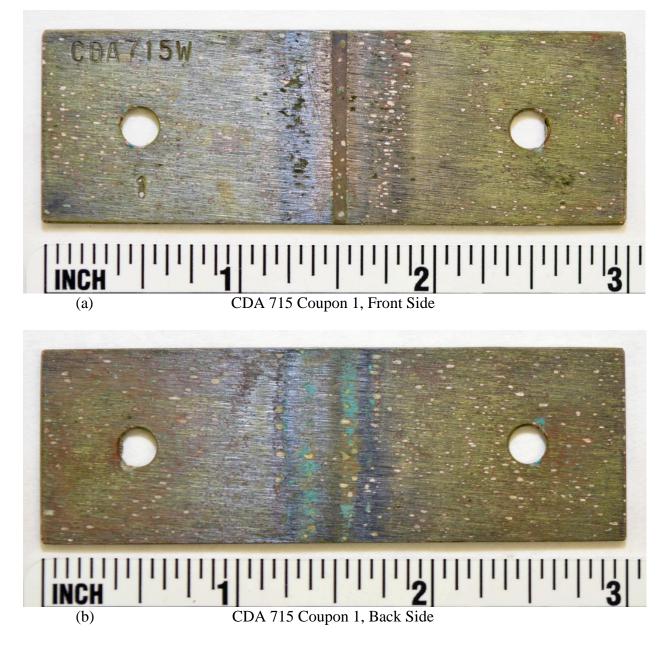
Photographs of CDA 715 coupon 1 (a) front and (b) back side after a 3 month corrosion test.
